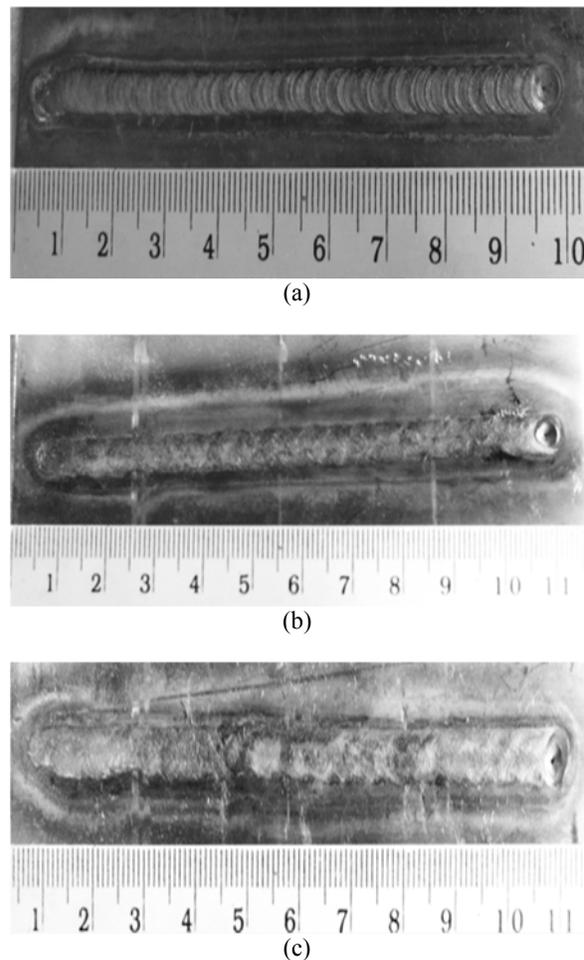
The appearance of weld bead with the target is 5 mm under different welding current: (a) 55 A, (b) 60 A, and (c) 65A.
